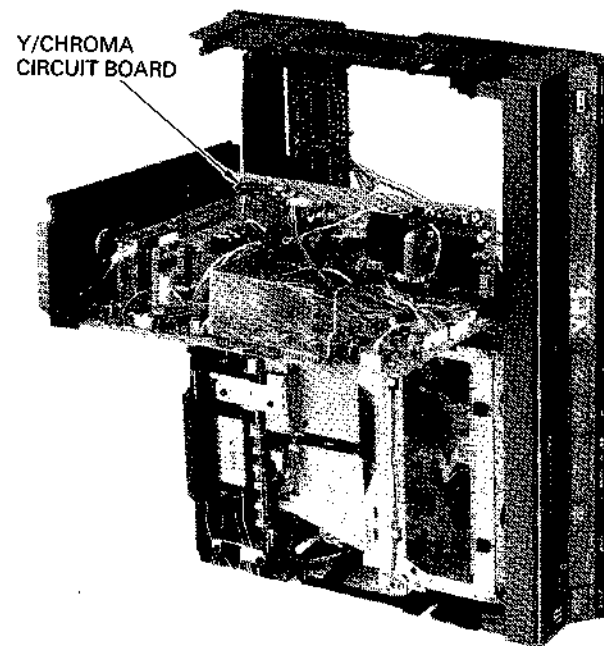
Ready to Adjust Y/Chroma circuit Board
